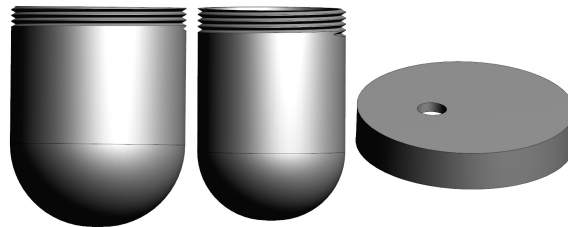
The design of the mould for the head phantom using with MWI device.
